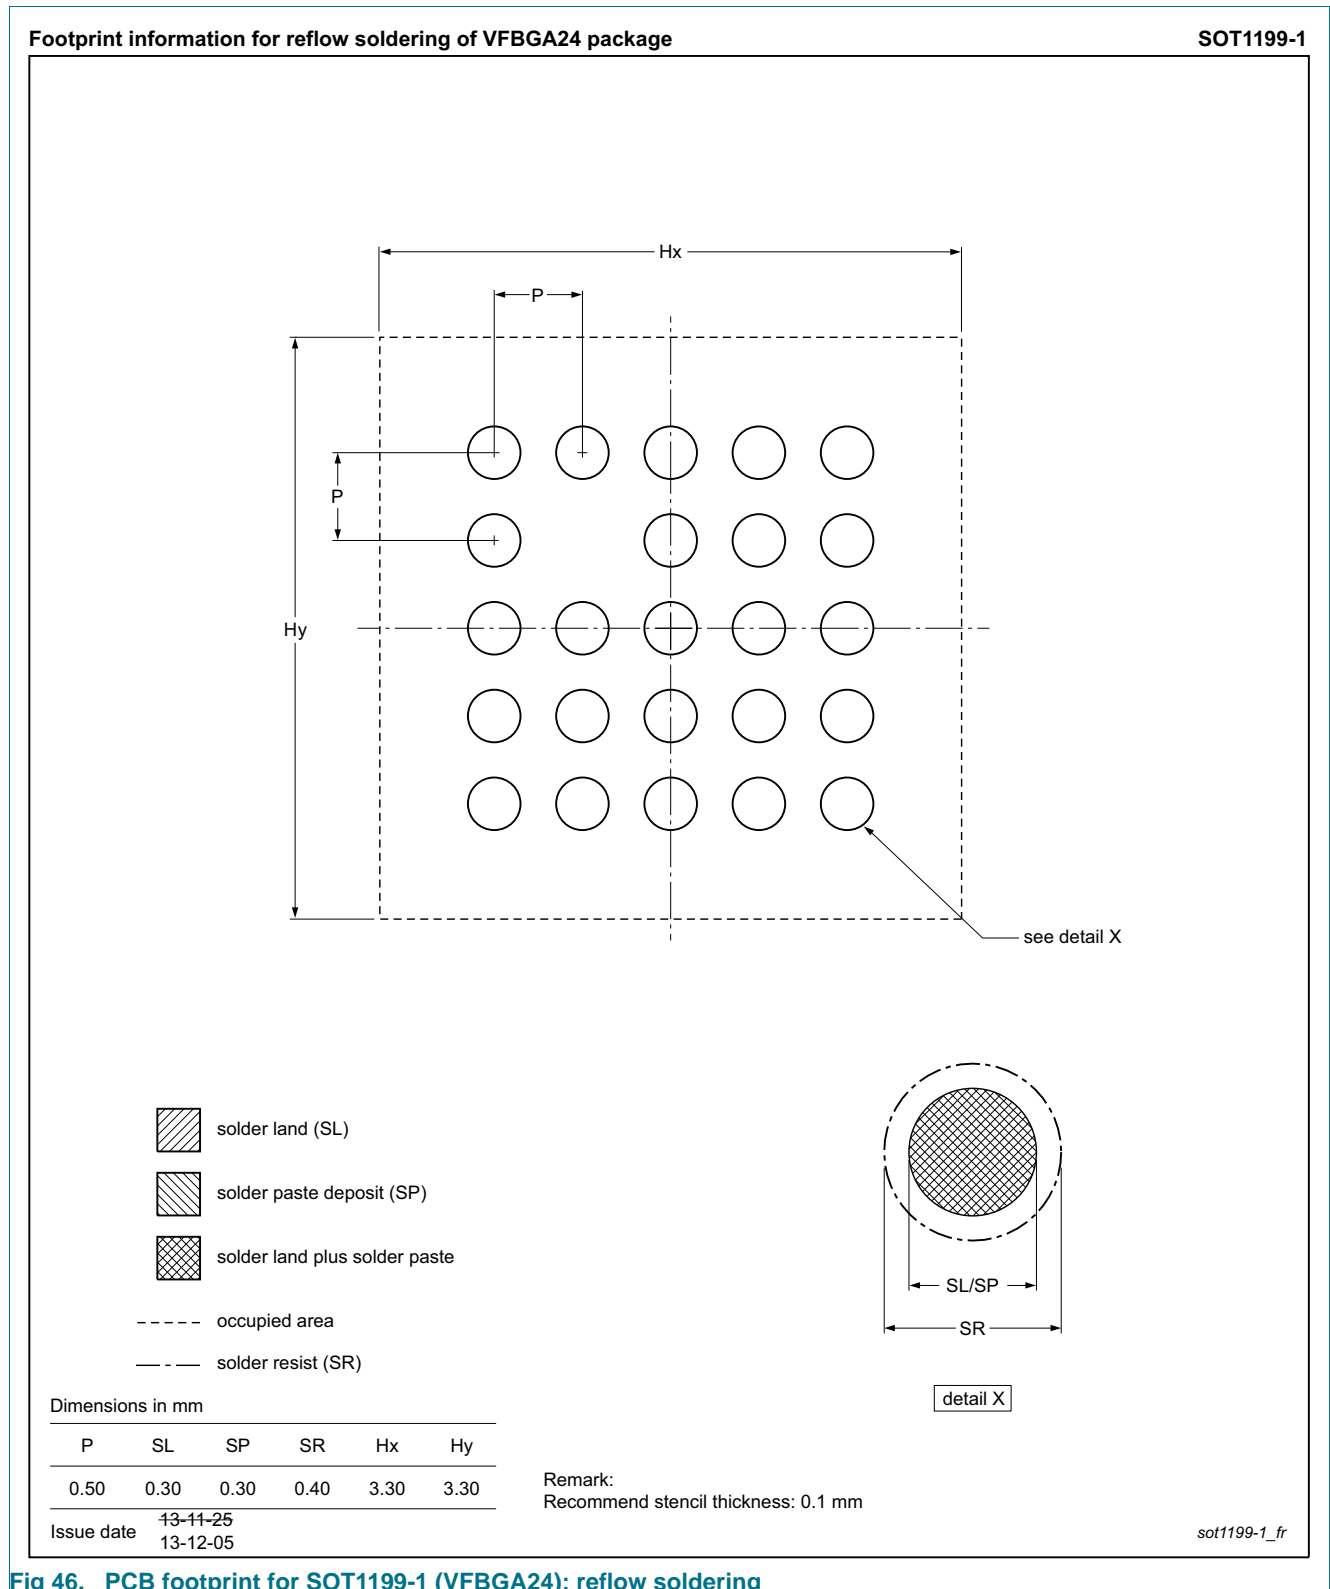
PCB footprint for SOT1199-1 (VFBGA24); reflow soldering
